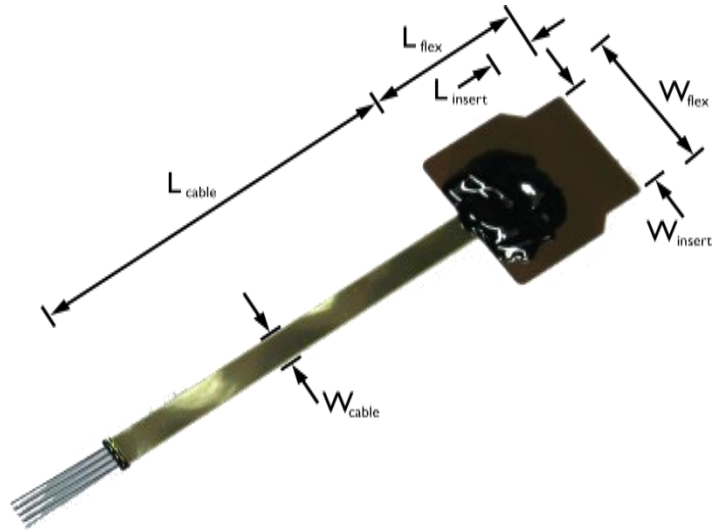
32-channel probe with Cable-ZIF-plug assembly.
